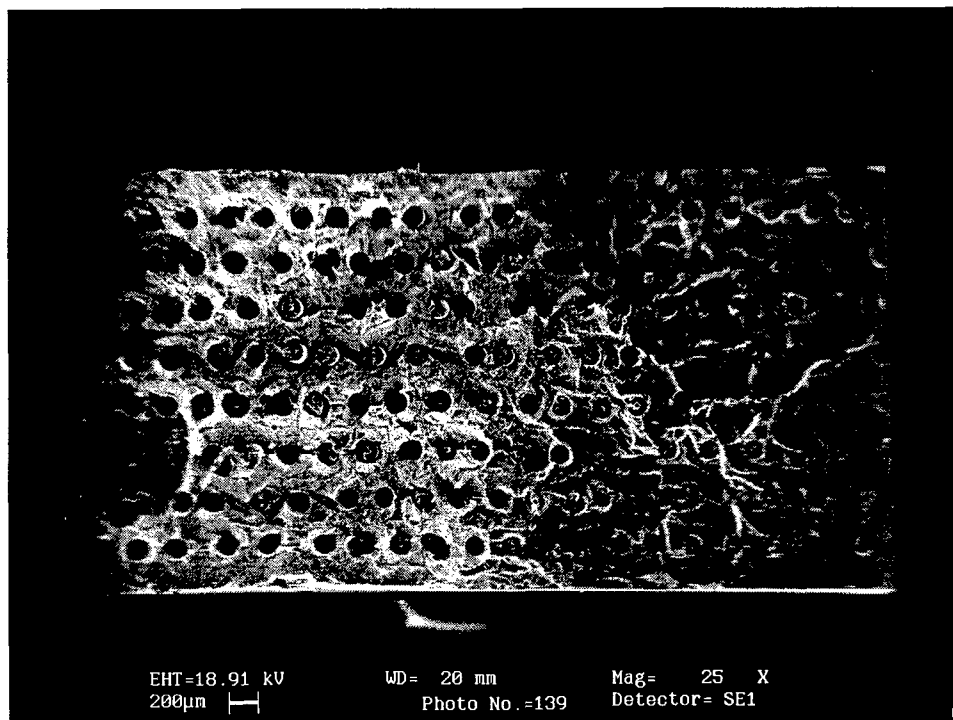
0.0025 mm/mm 15%  $V_f$  Specimen Fracture Surface
